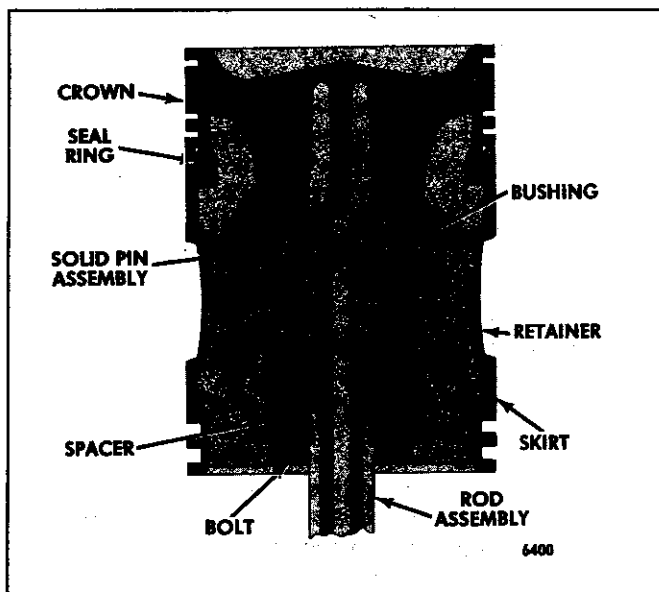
Cross-Head Piston and Connecting Rod Assembly
